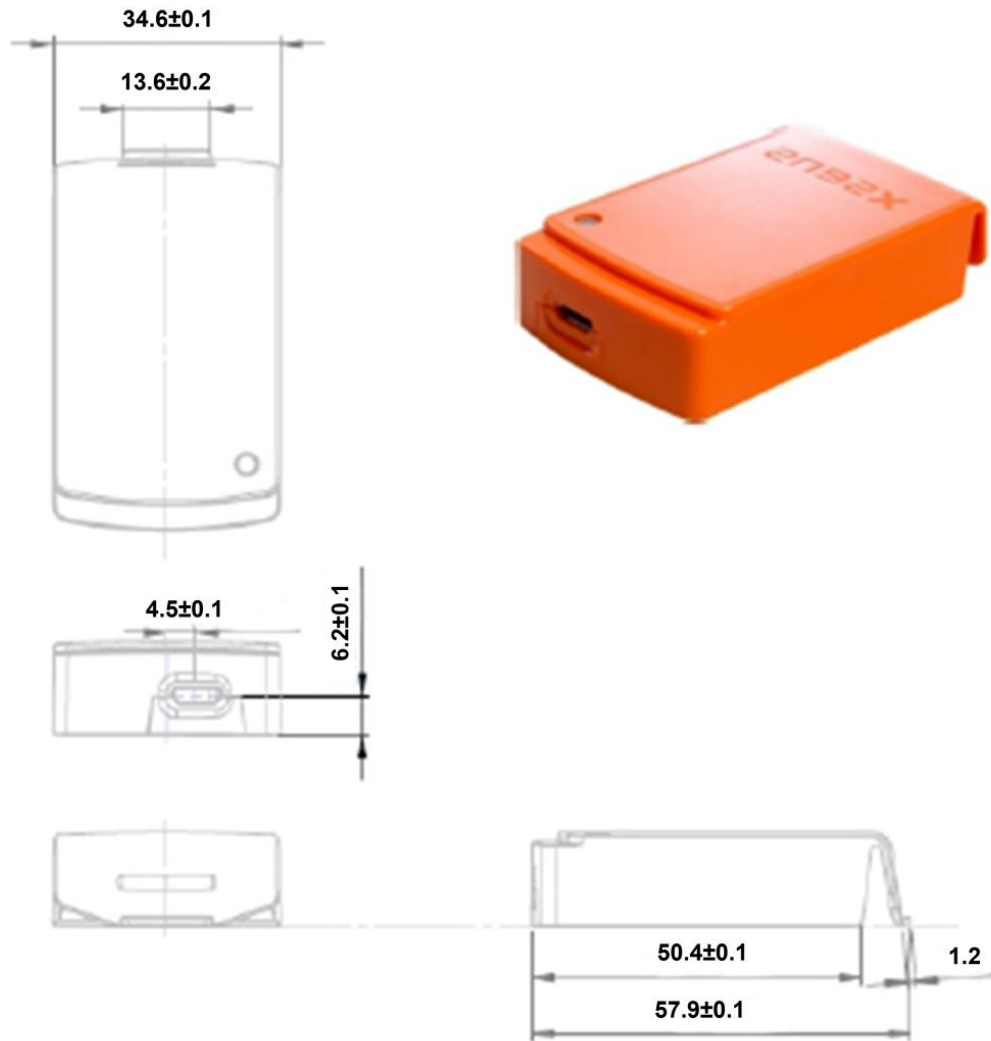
Drawing of a wireless motion-tracking unit; the dimensions are in millimetres [159].
